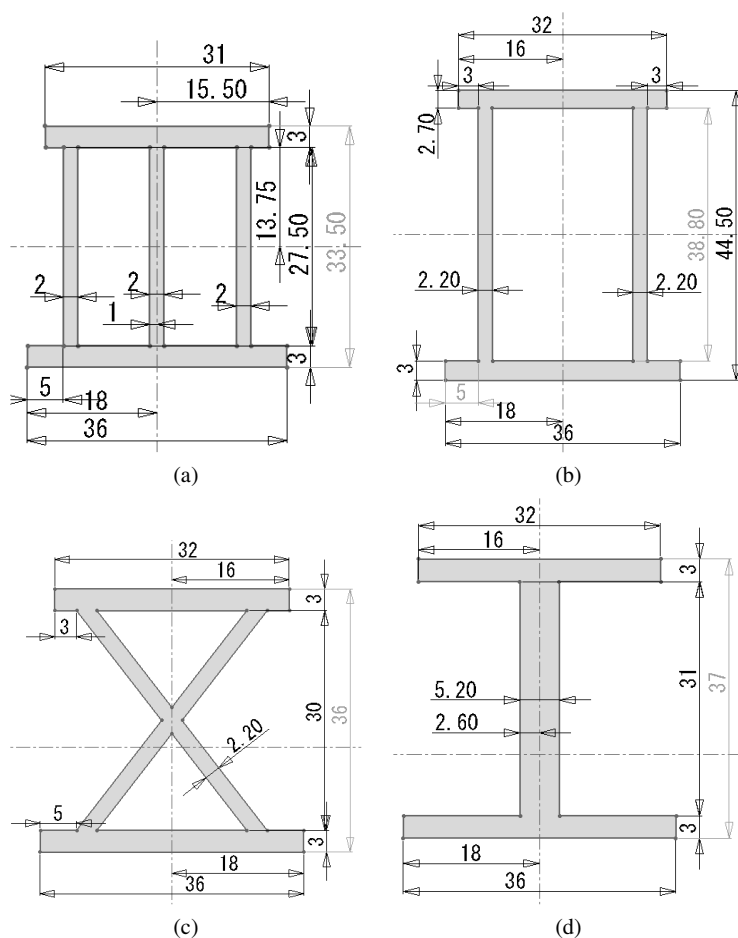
(a) Cross-section of III beam; (b) cross-section of II beam; (c) cross-section of X beam; (d) cross-section of I beam.
